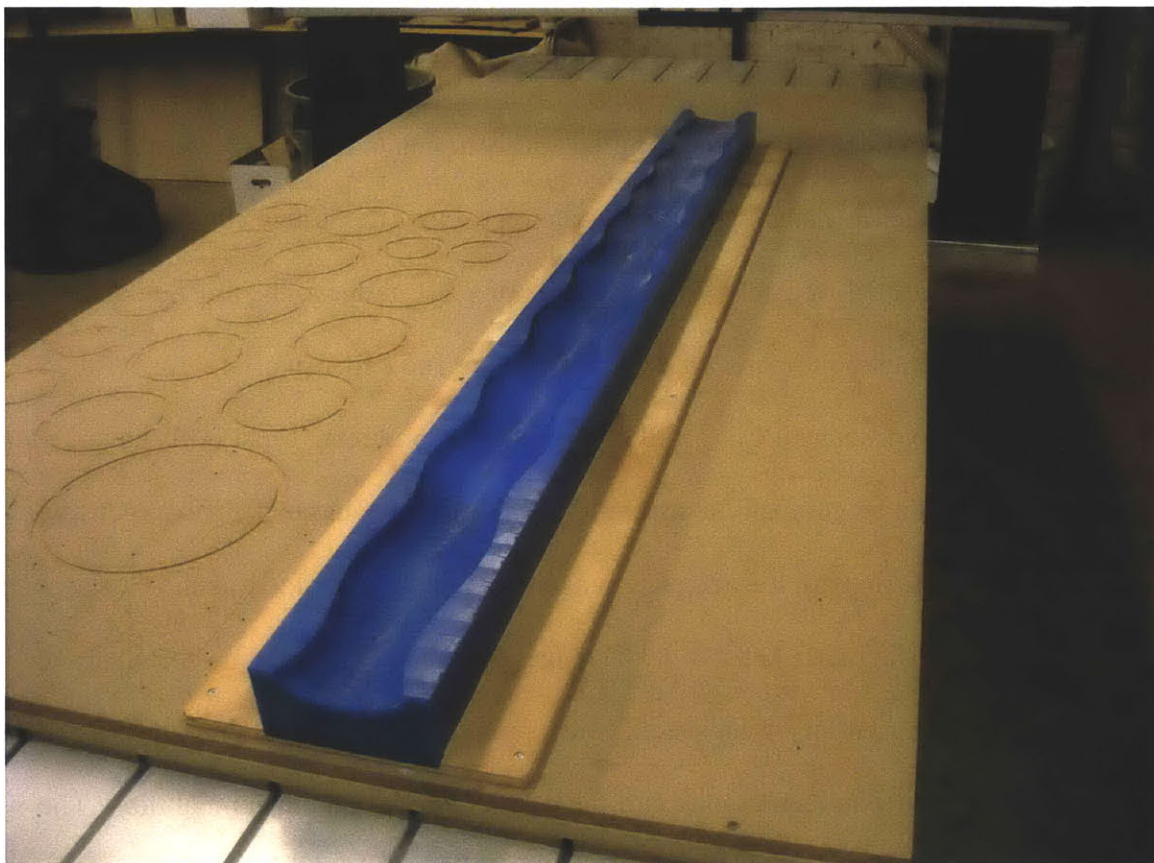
Half of the whisker mold (post machining) attached to the router table and plywood alignment jig
